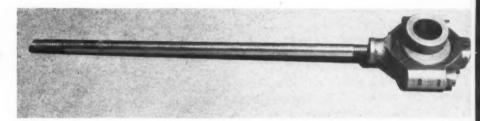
Case hardening of the free-machining steel used in feed bar for industrial sewing machine provides the required fatigue resistance. Photo, courtesy Union Special Machine Co.
